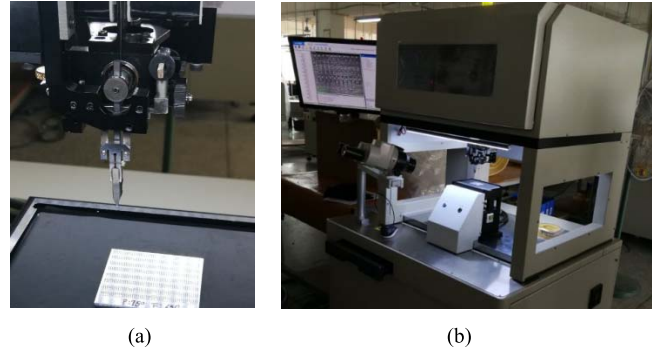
Experimental platform. (a) Ultrasonic bonding head. (b) Bonding machine.
